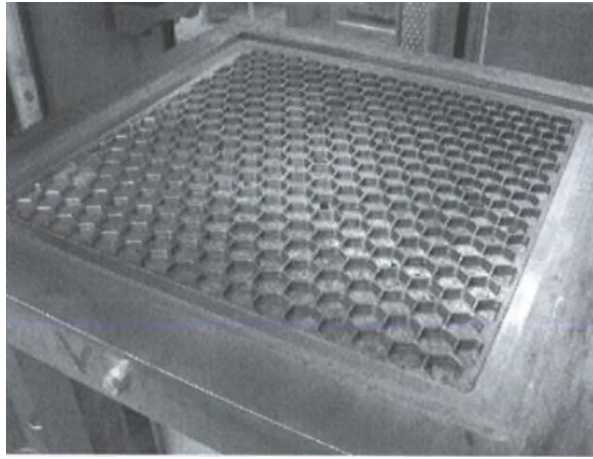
Molding tool for structuring sheet metals by hydroforming in BTU [80]
